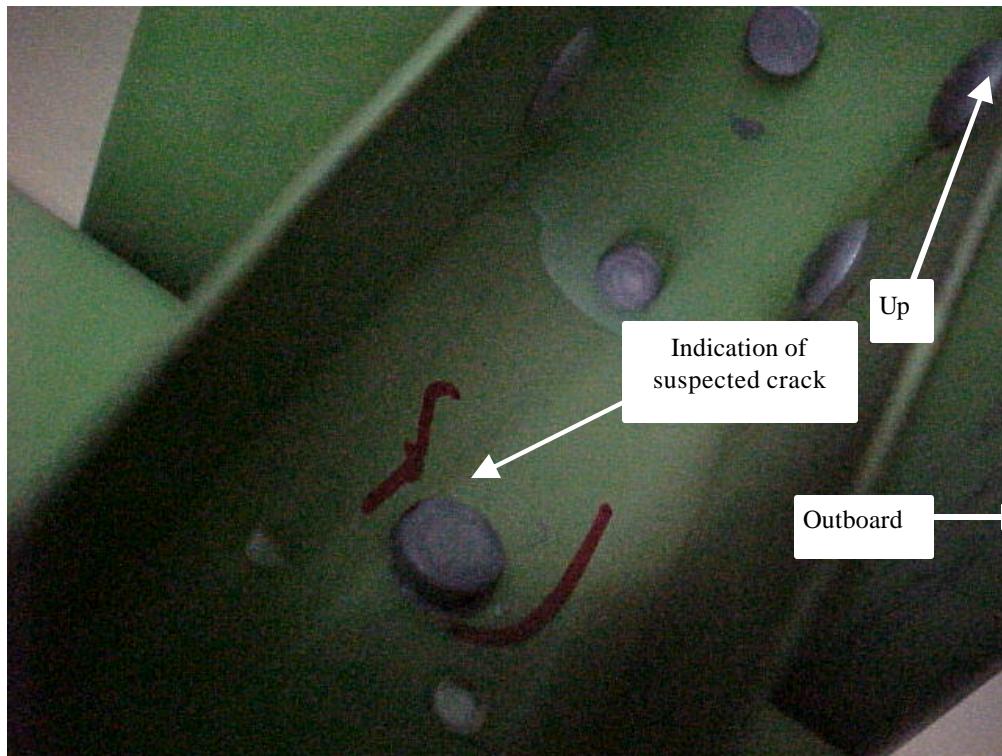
Photograph of stringer clip at FS 720A, stringer 3R. Detailed visual inspection discovered an indication.
